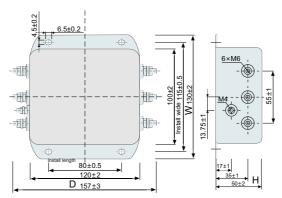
Simple Filter Outline and Installation Dimension Figure
